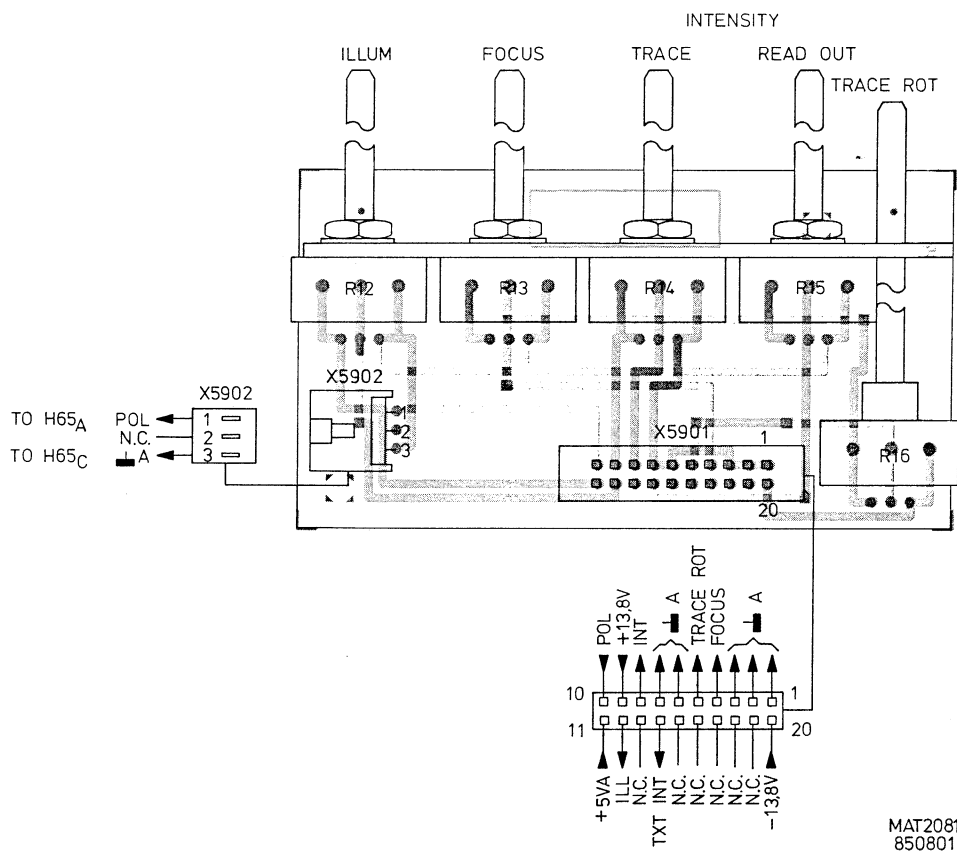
CRT controls unit, p.c.b. lay-out.
